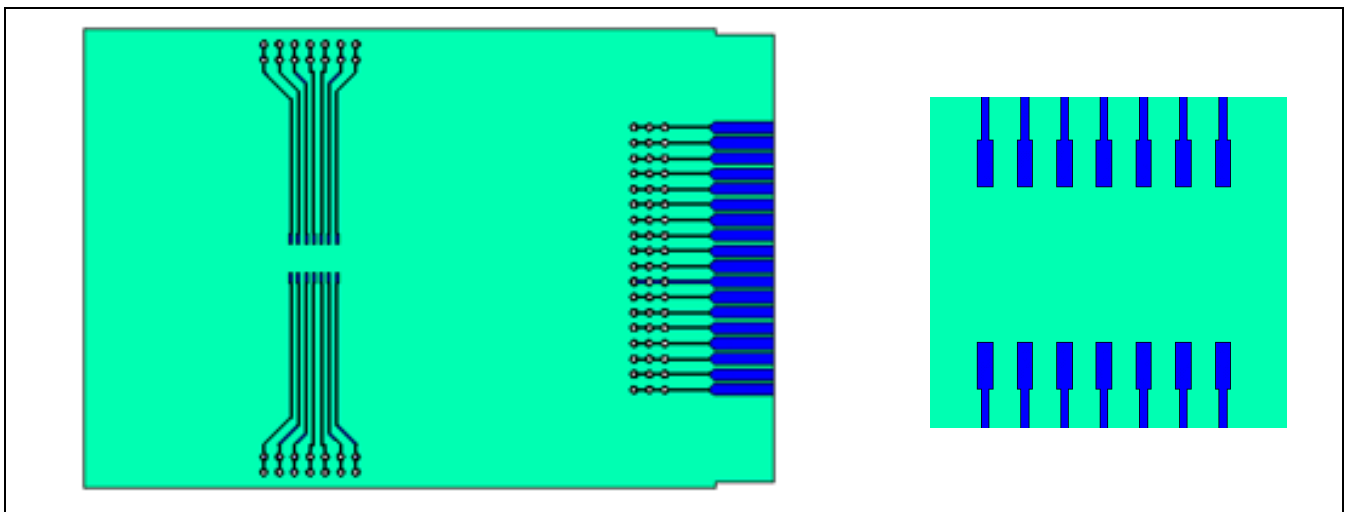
PCB reference layout (according to JEDEC 1s0P)
